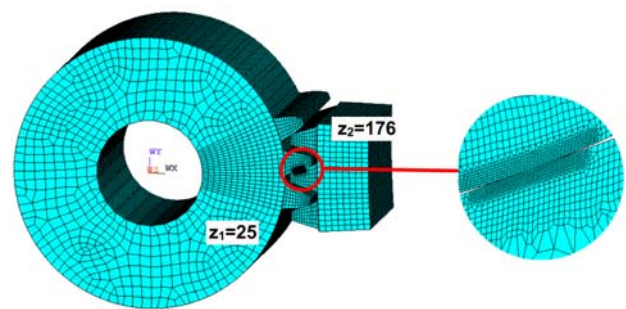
Main view of gears teeth meshing of high mass horizontal cylinder machine
